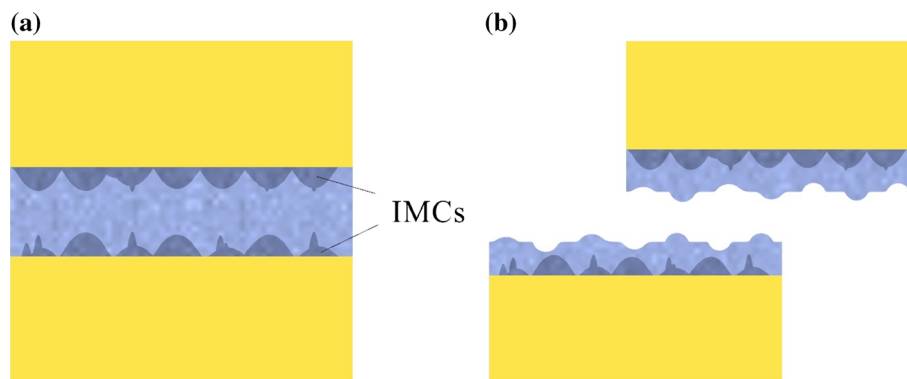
The schematic diagrams of the solder joints (a), brittle fracture (b).
